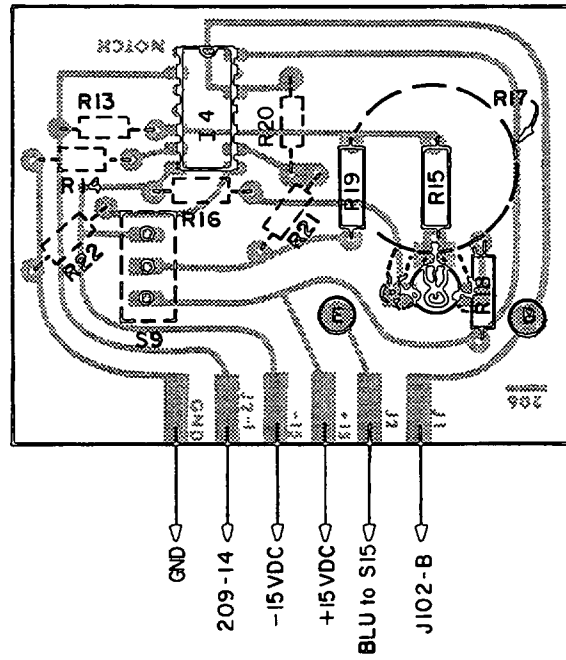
P.C. BOARD ASSEMBLY, BOARD 206, DRAWING
